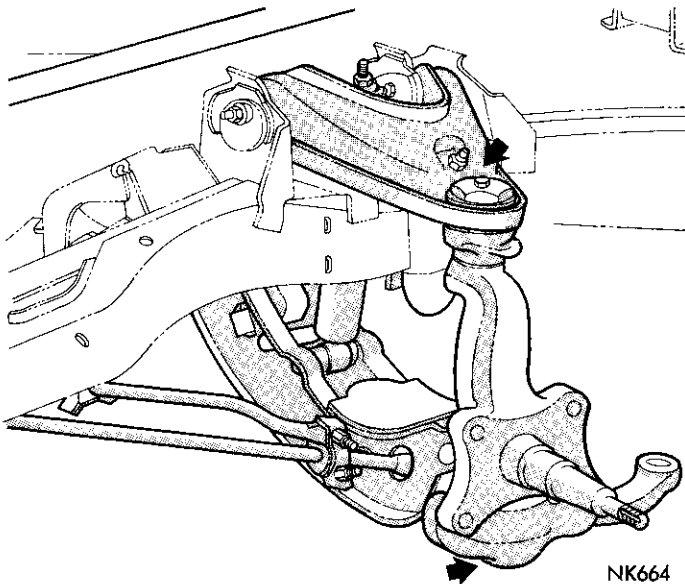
Upper and Lower Ball Joints (Chrysler Models)
